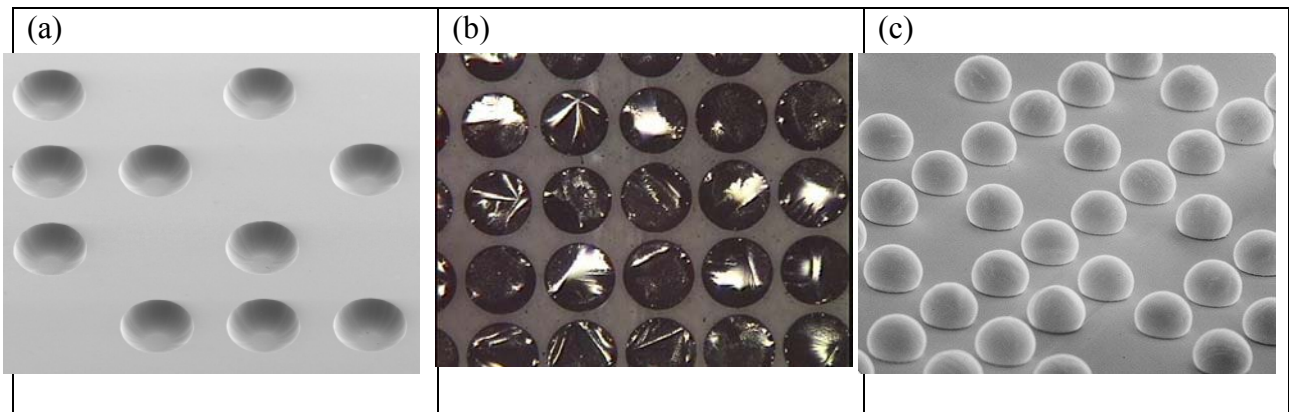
Micrographs showing (a) typical cavity structure in a glass mold used in C4NP, (b) solder bumps filled in the cavities, and (c) solder bumps transferred onto a silicon wafer and reflowed to form solder bumps in a spherical shape (about 100 μm in diameter).
